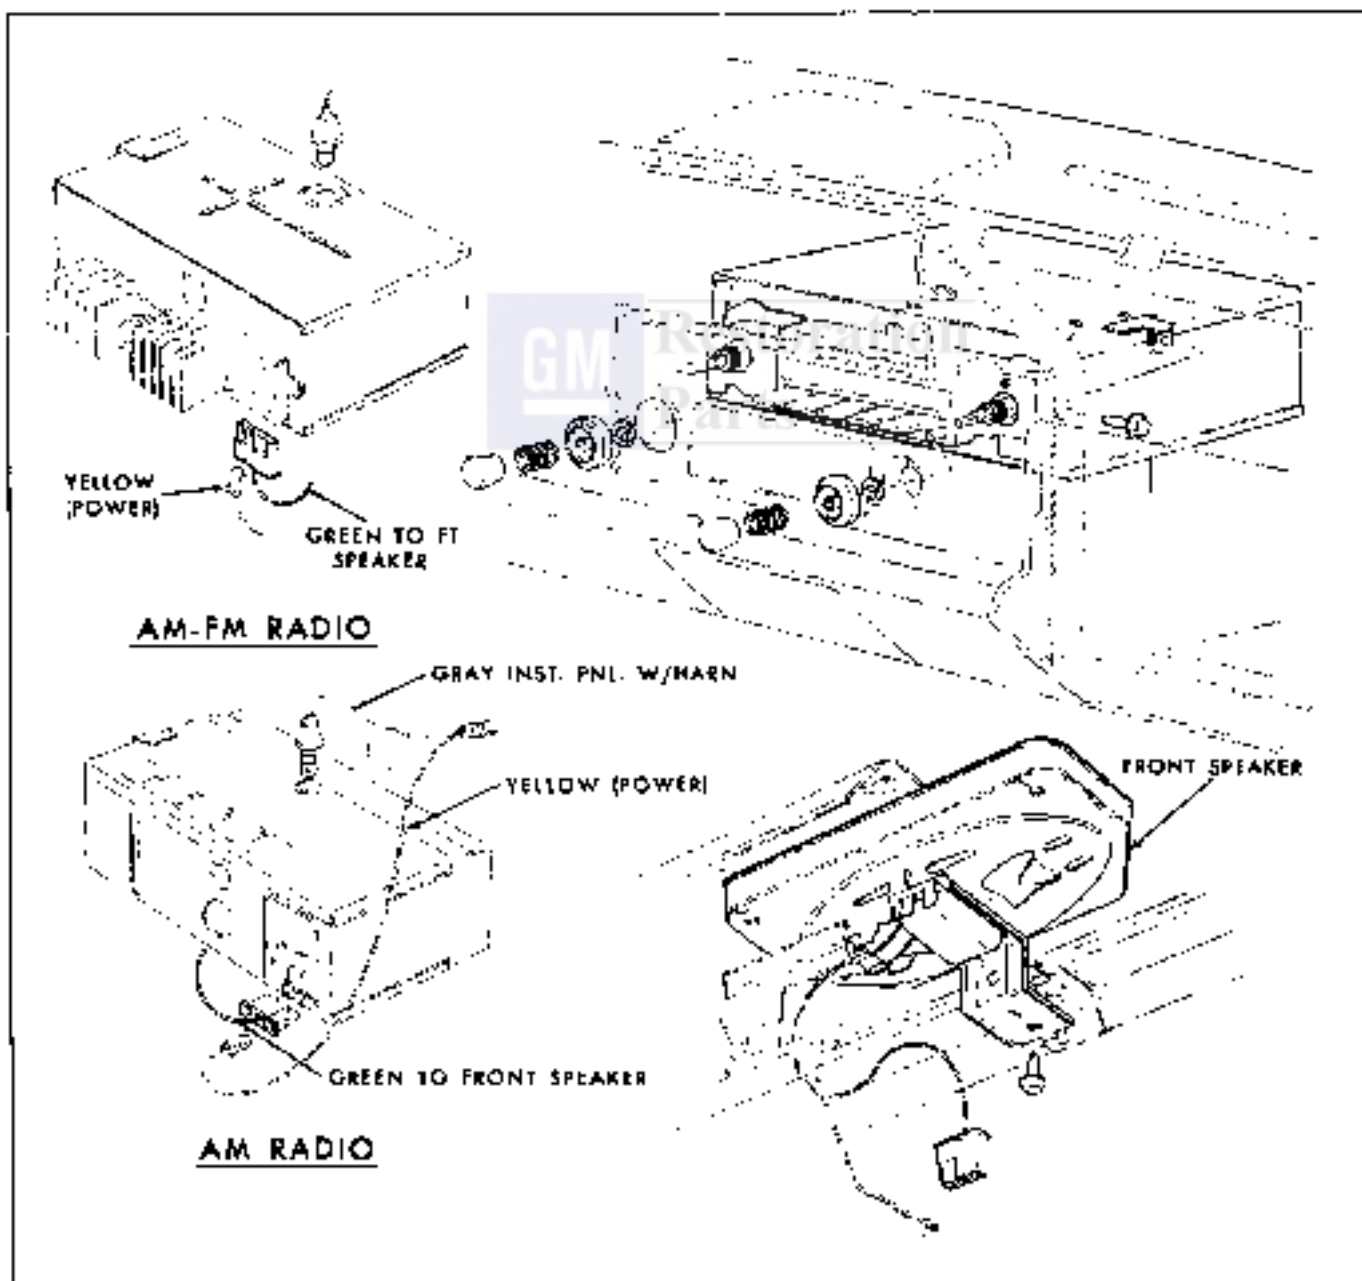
Radio Removal and Front Speaker—Tempest
